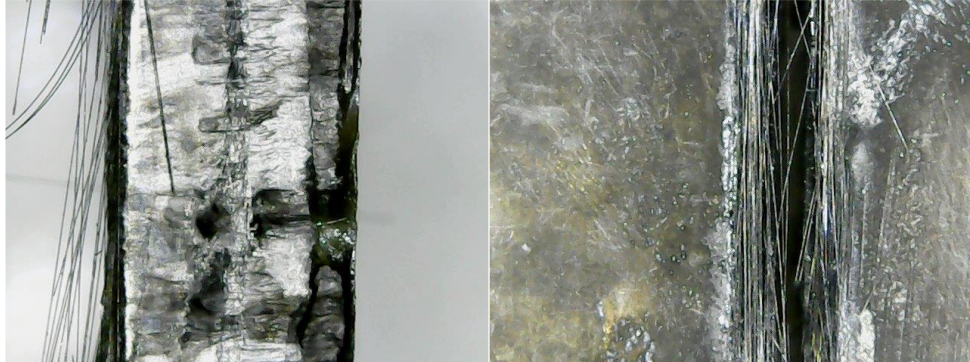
Microscope images of edge side (left) and top side (right) of laser cutting test 55.
